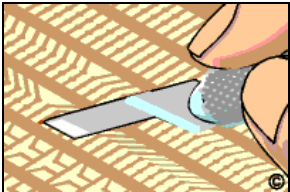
Scrape off the bonding film from solder joint area on the back side.
